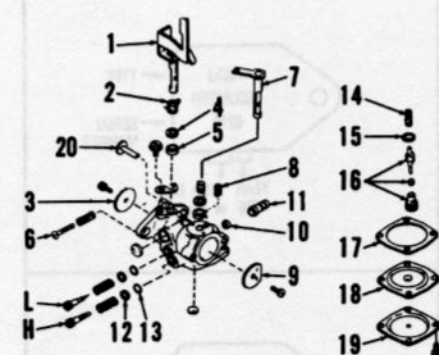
Exploded view of typical Tecumseh diaphragm type carburetor. Some models do not use fuel pump (20) and check valve (10).
